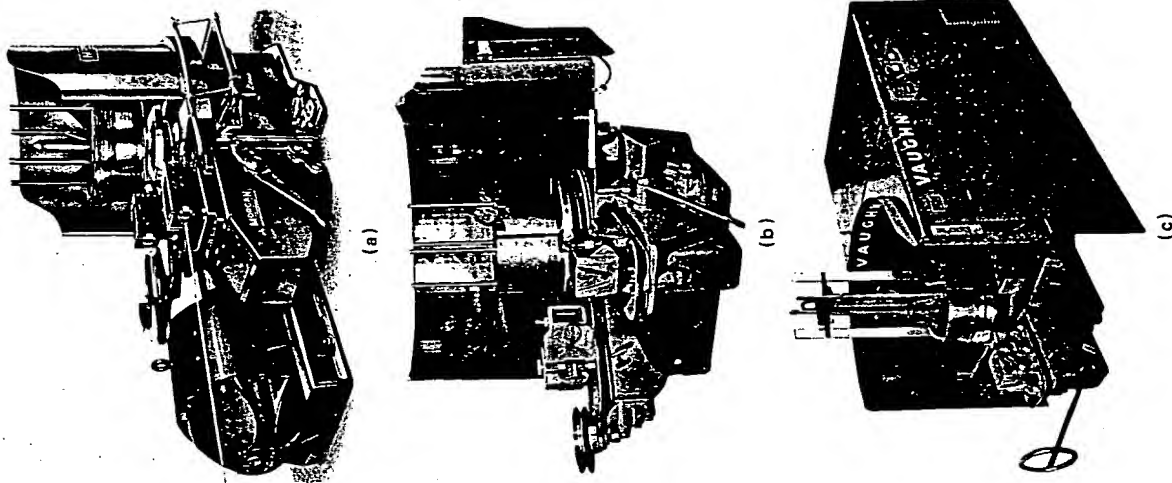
Three examples of single block vertical-spindle machines: (a) direct-connected, double draft equipment, front motor (Courtesy Morgan Construction Co.); (b) direct-connected, double draft equipment, rear d-c motor (Courtesy Vaughn Machinery Co.); (c) direct-connected single-deck Motobloc (packaged) Model 15 (Courtesy Vaughn Machinery Co.).
